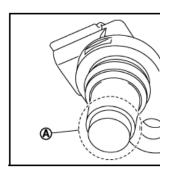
Identifying Camshaft Position Sensor Magnet Area Courtesy of NISSAN NORTH AMERICA, INC.
